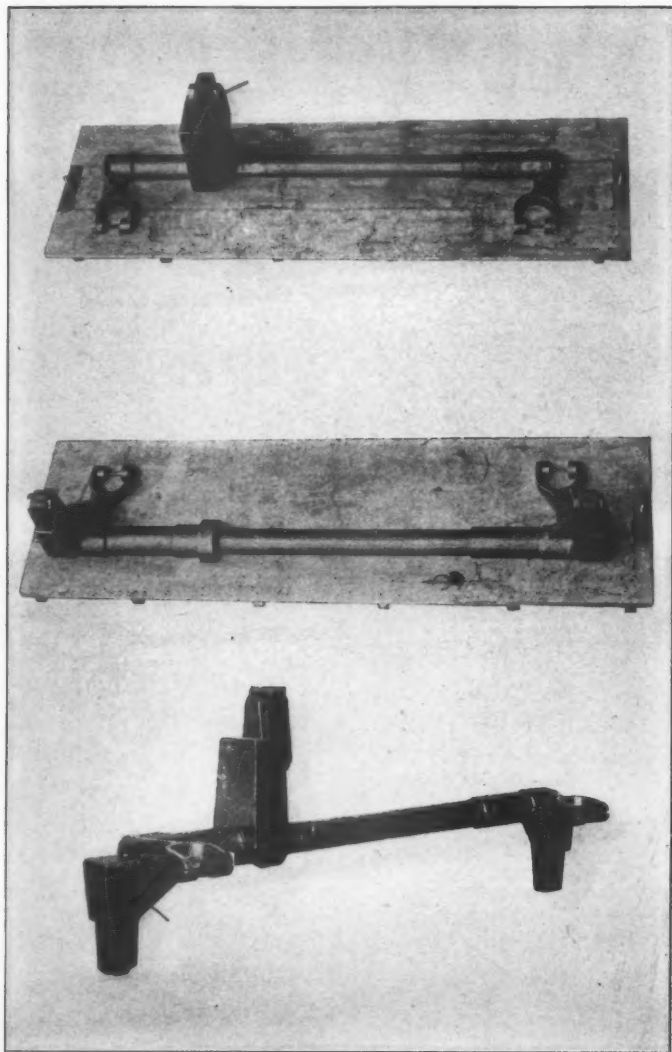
(Upper Two) INTRICATE SHAPED PATTERNS MOUNTED ON
